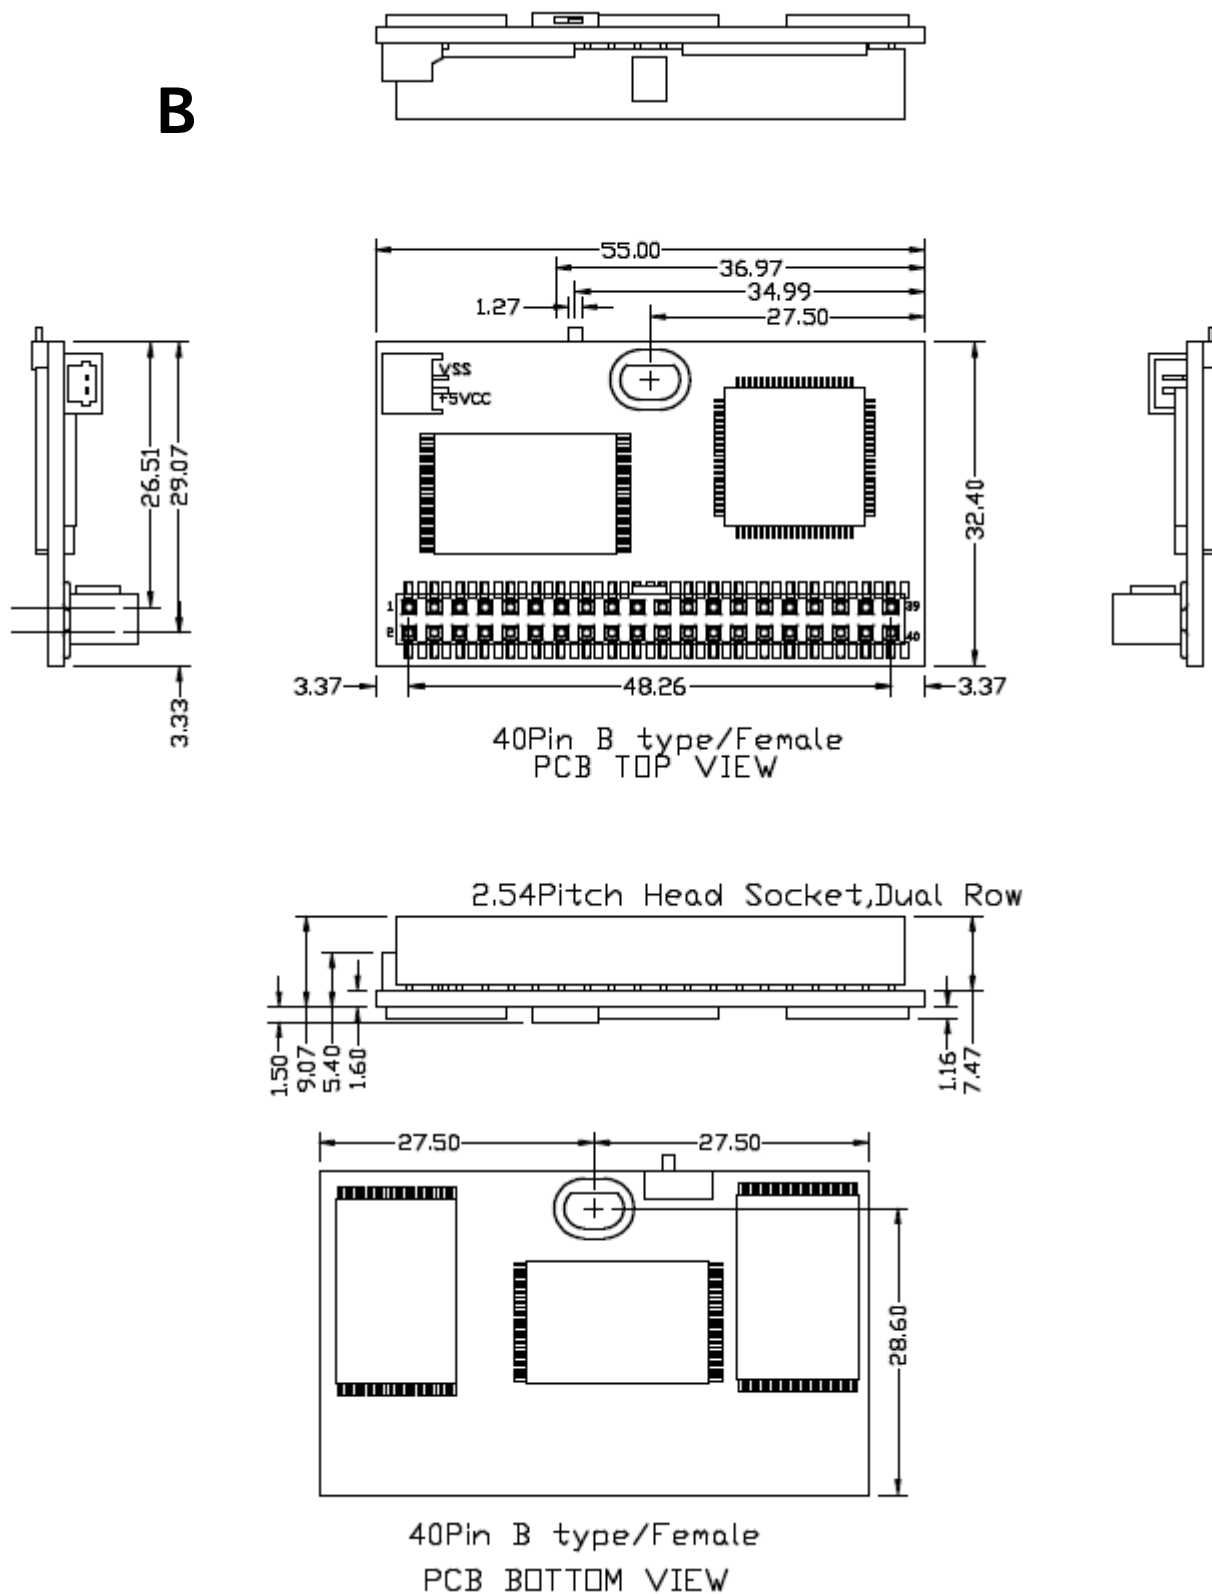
Mechanical Dimension of EDC4000 40-pin(Horizontal Female Type B)
